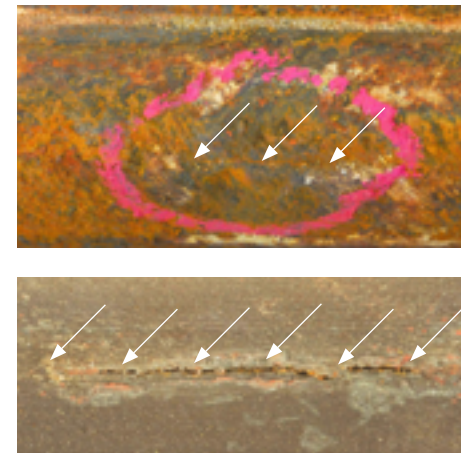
Tube A: Close views of leak area on the tube outer TOP and inner BOTTOM surfaces. An axially-oriented through-wall crack was present (arrowed).
